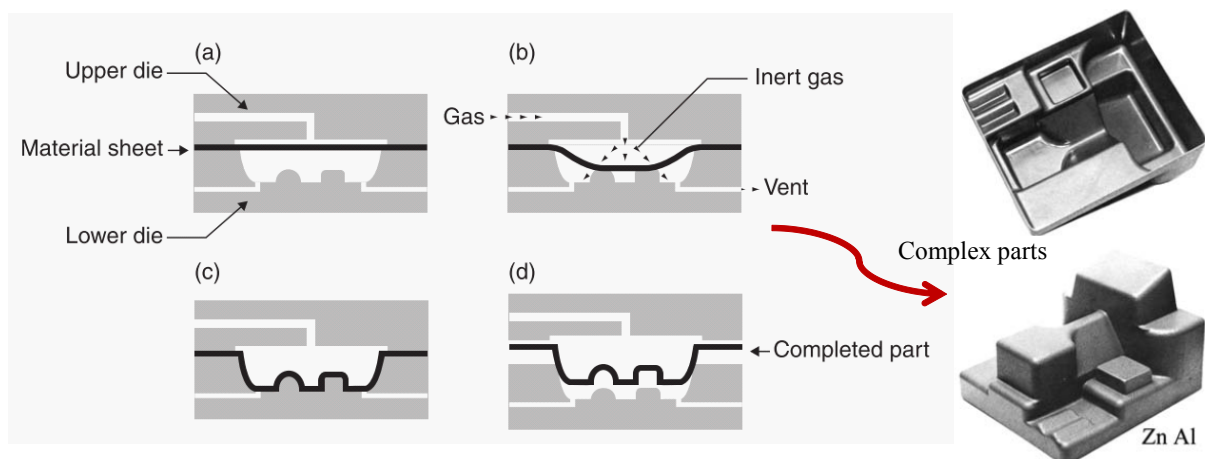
The blow forming process: (a) initial flat sheet inserted between the upper and lower dies; (b) progression of forming under gas pressure; (c) final shaped part in contact with the lower die; and (d) removal of the part.
